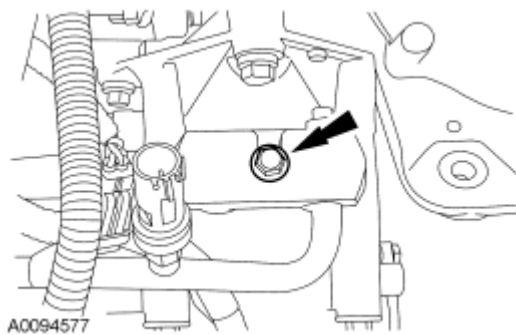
Locating A/C Compressor Manifold Tube Assembly Bolt
